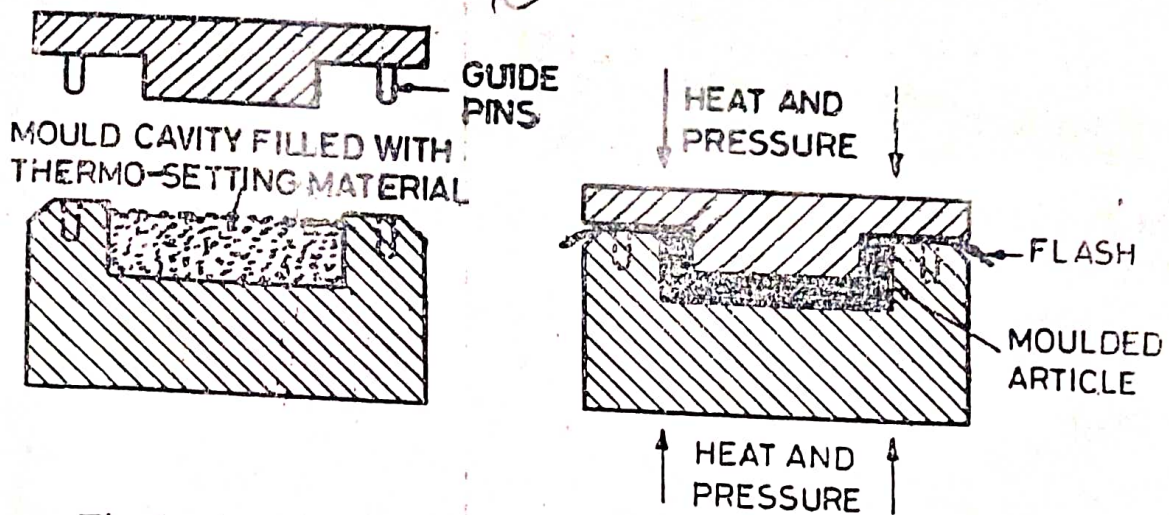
Schematic diagram of a mould employed for compression moulding.
